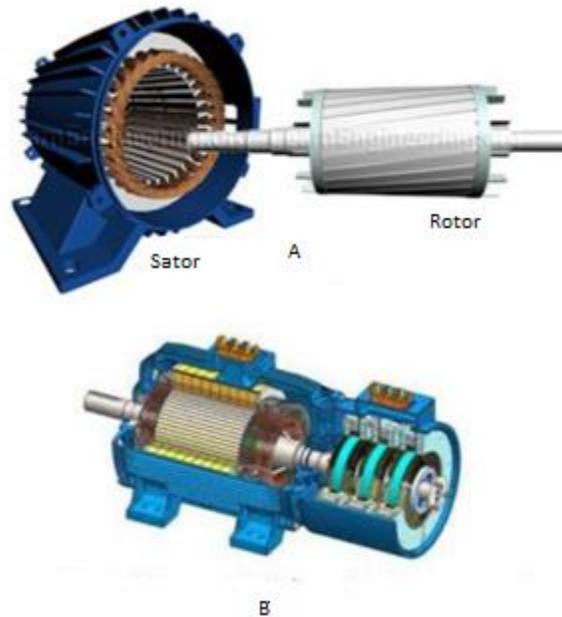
(A) Squirrel cage rotor and (B) Slip-ring rotor
